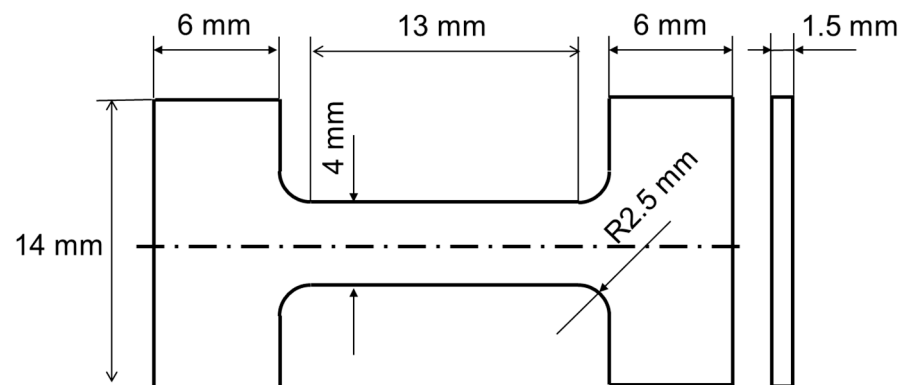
Dimensions of the tensile samples of the IN718 coatings.
